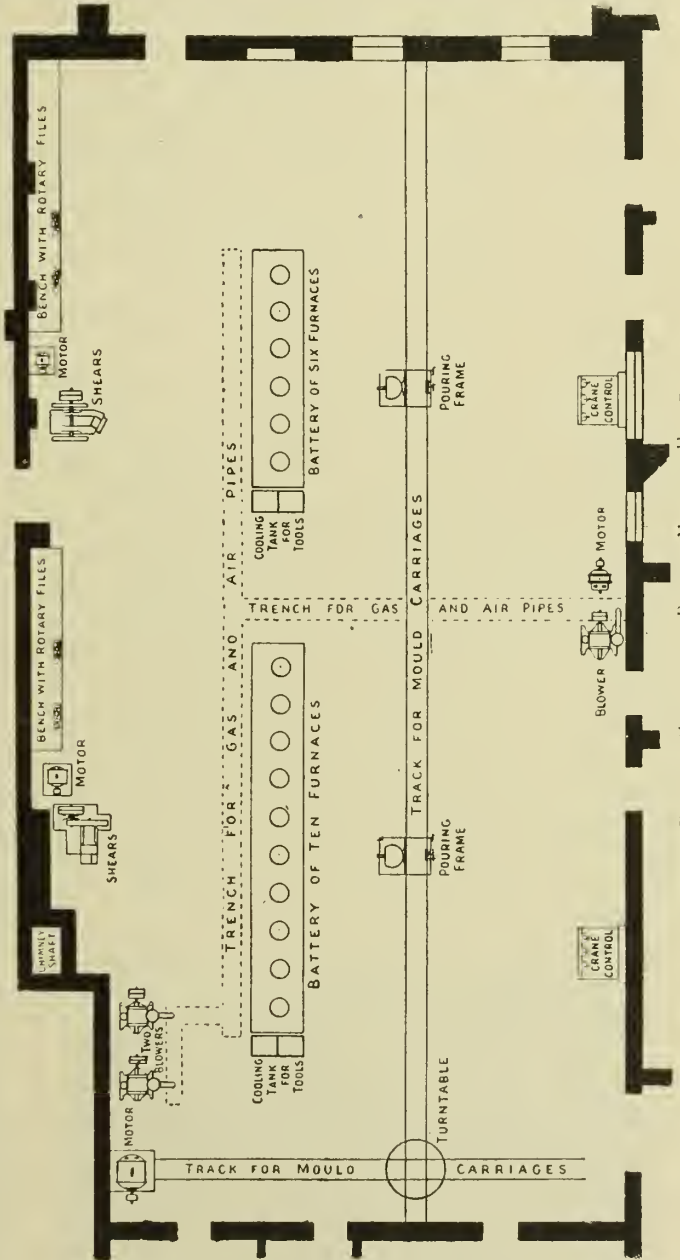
PLAN OF SILVER AND BRONZE MELTING HOUSE.
